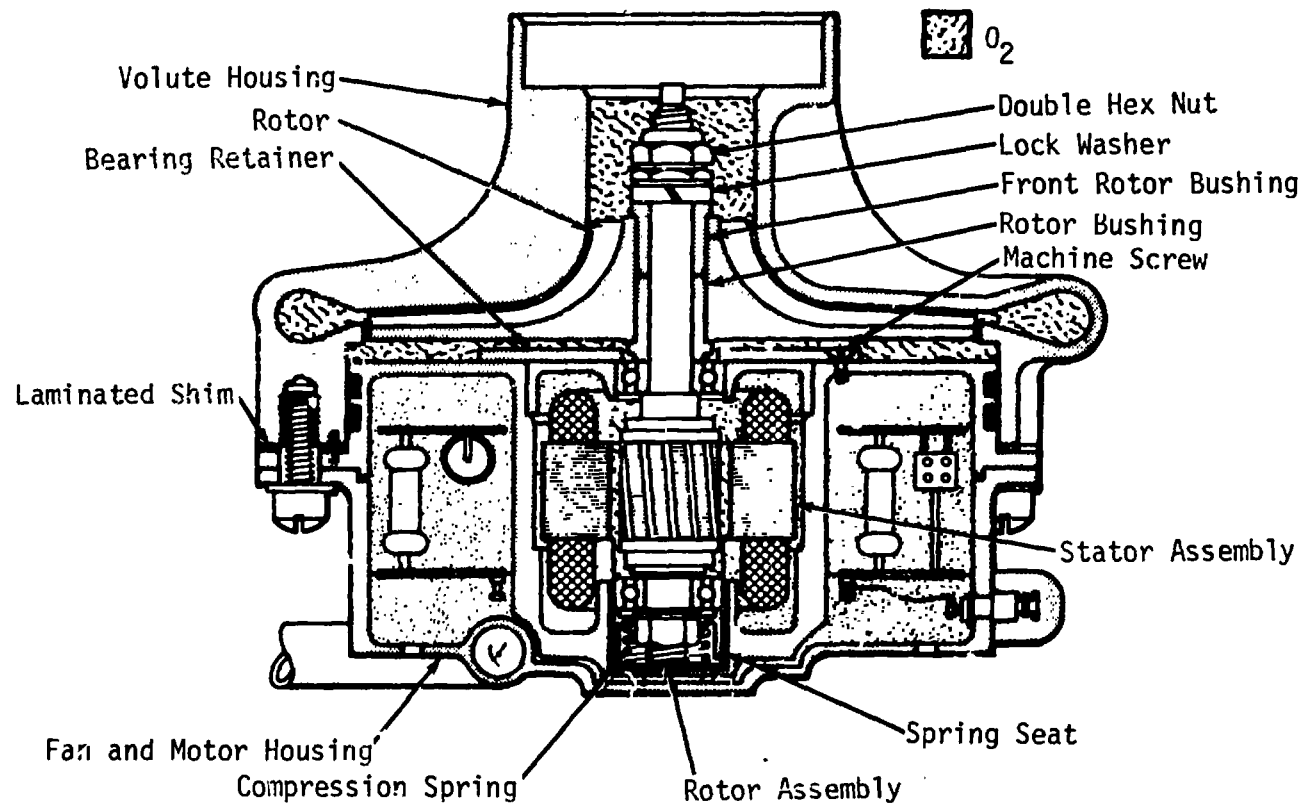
PLSS Fan Motor Assembly Sectional View.
